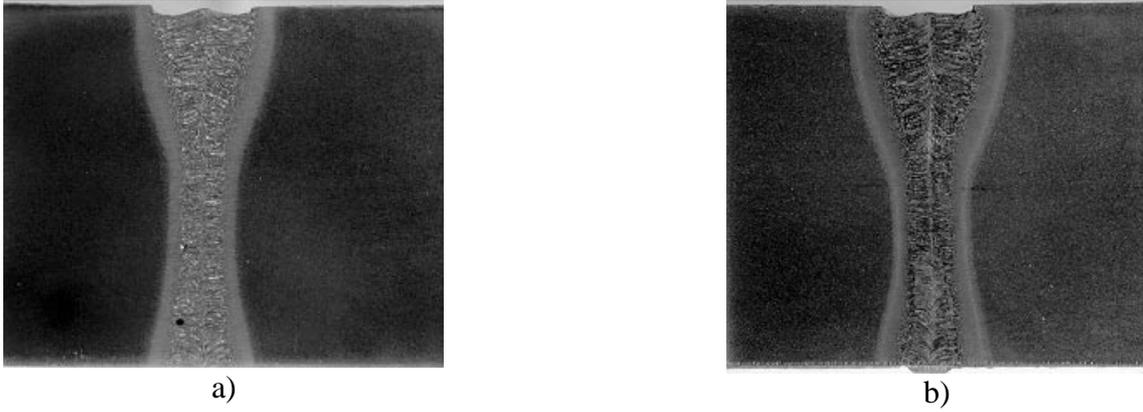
Macrographs of 12 mm thick 17kW CO₂ laser welded steel plates;
